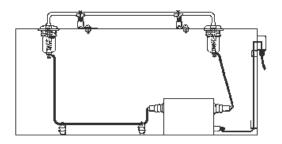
A schematic layout of a box-type neon sign, showing relative location of transformer, mounting parts, cable, tubing,etc.
